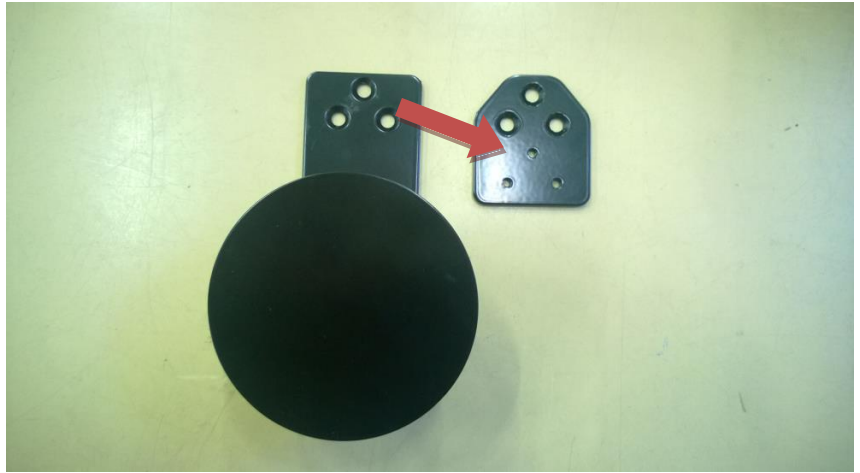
Cover the holes of the metal hook with the holes on the plate that is located on the enclosure as it is shown on the figure
